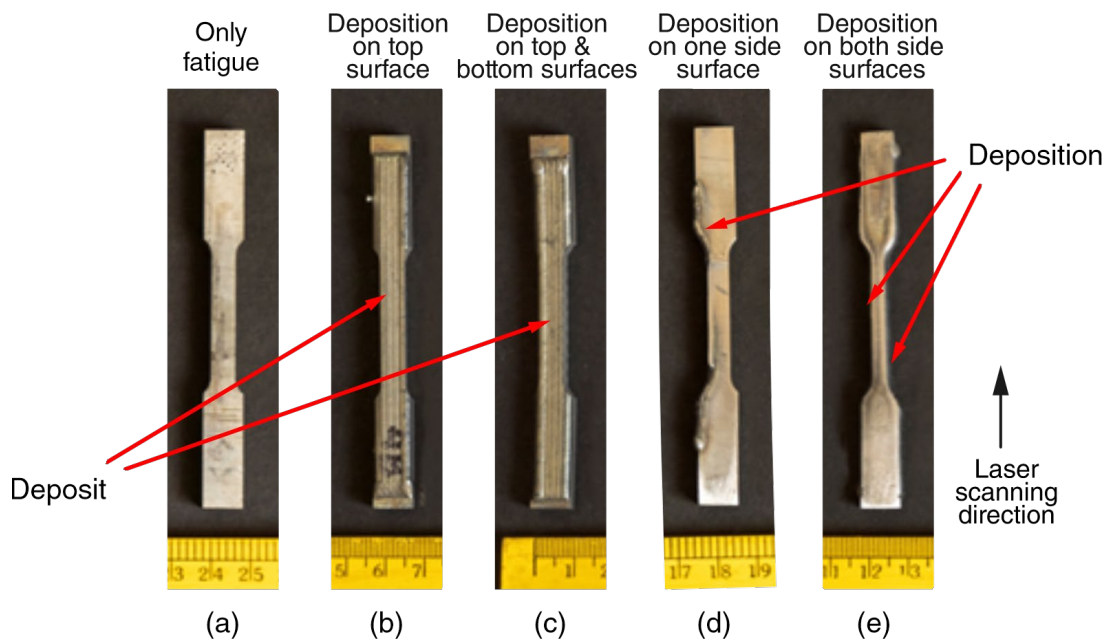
Tensile specimen after (a) fatigue, (b) deposition on top surface, (c) deposition on top and bottom surfaces, (d) deposition on one side surface and (e) deposition on both side surfaces
